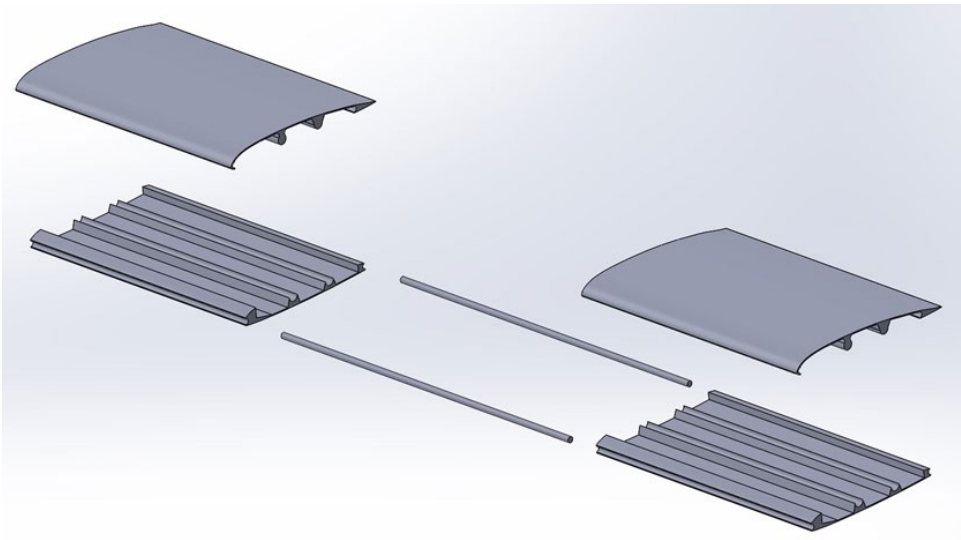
Exploded view of one of the trailing edge deflection assembly.
